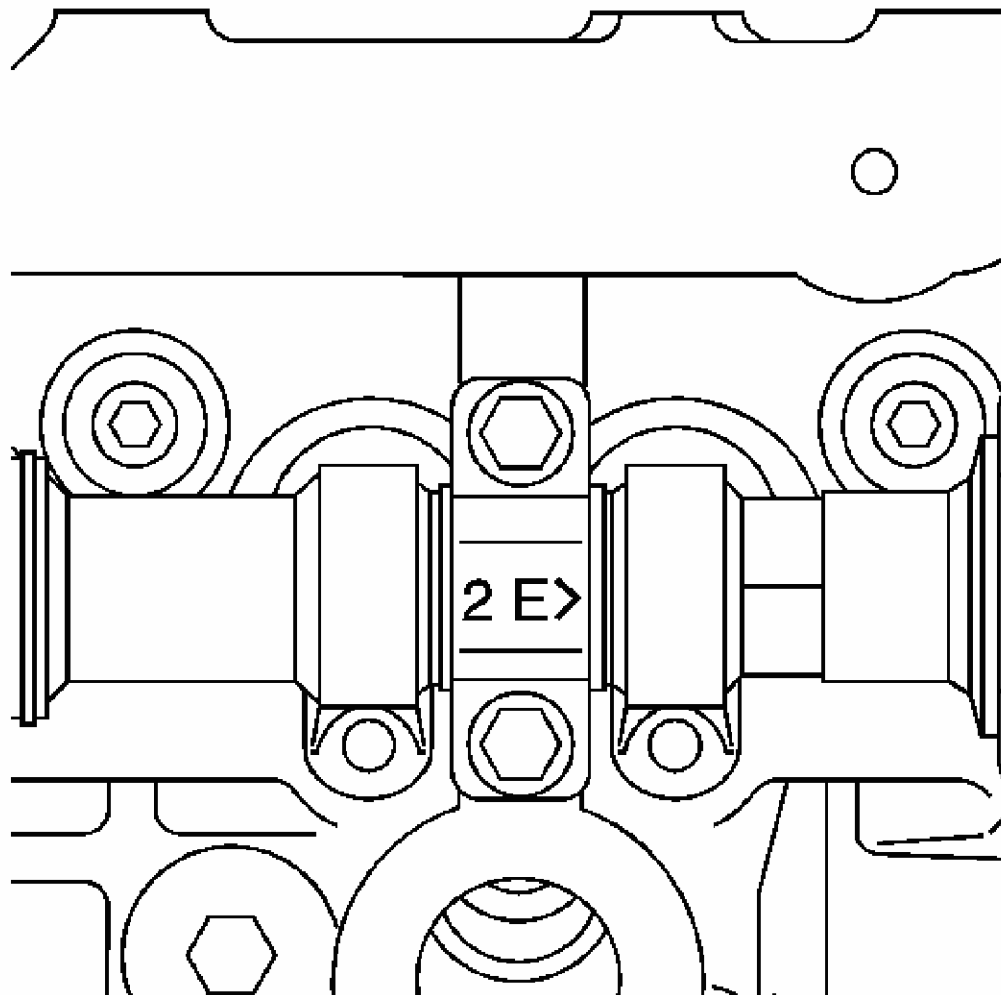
View Of Exhaust Camshaft Bearing Cap Markings
